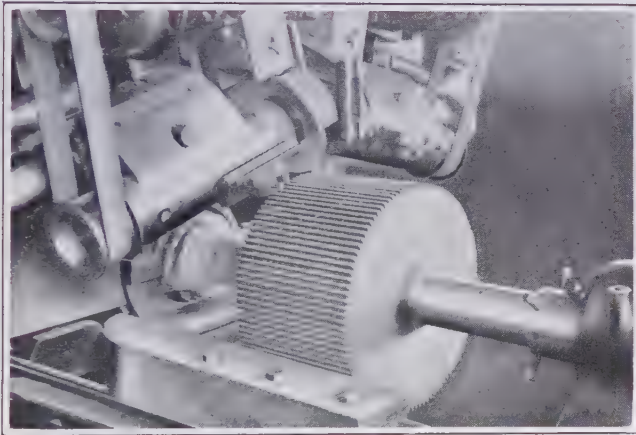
Large gear of wide face in position in the Maag gear grinder.
